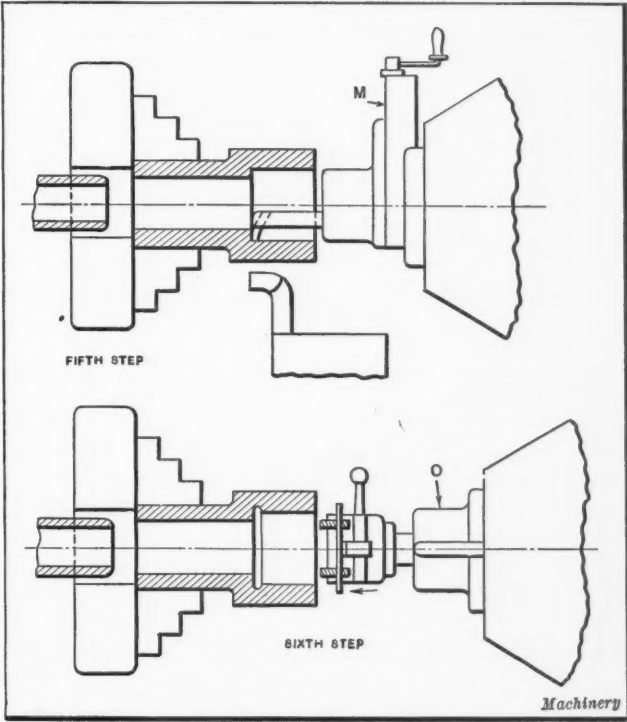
Using the Slide Tool for cutting the Recess and a Collapsing Tap for the Threads
